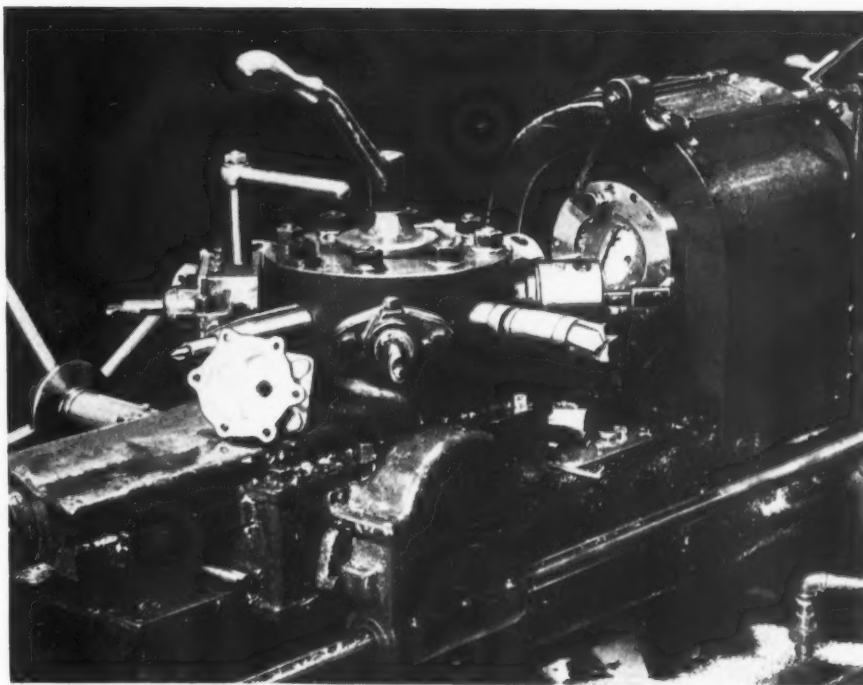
Turret Lathe Used for Machining the Two Gear Chambers of Pump Bodies within Unusually Close Limits of Accuracy
